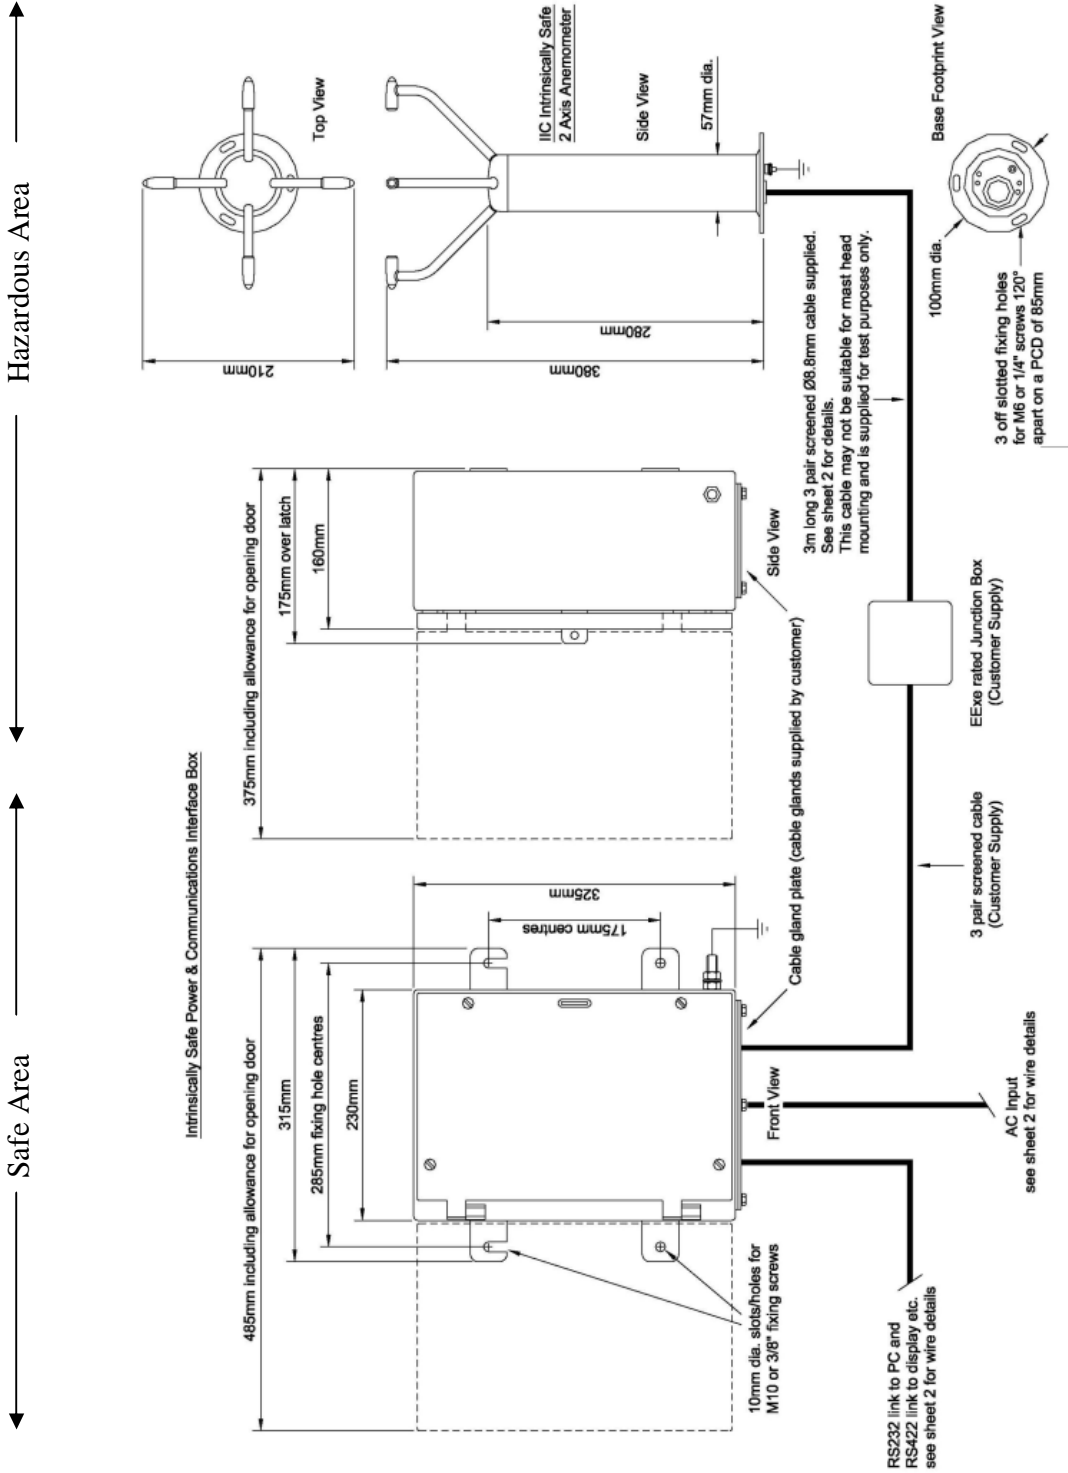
G-026 Issue 1, Type IIc I.S. Anemometer Dimensions
